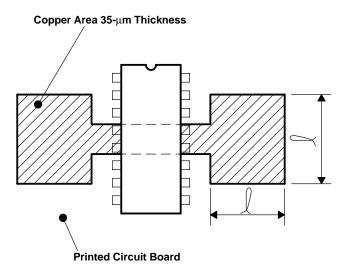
Example of Printed Circuit Board Copper Area (used as heat sink)
